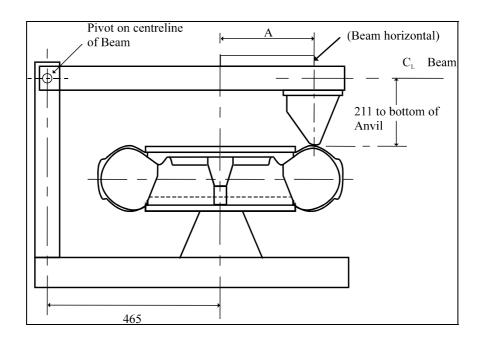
'Bead' Unseating Fixture Note - Dimensions in mm 'Test Rim' Nominal Dimension A Diameter inches mm mm mm
